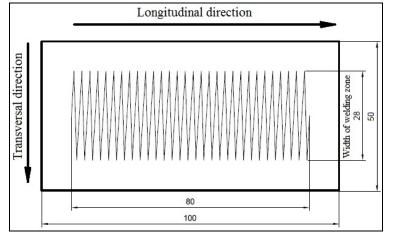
Geometry of the samples and the pattern of the welding torch movement
